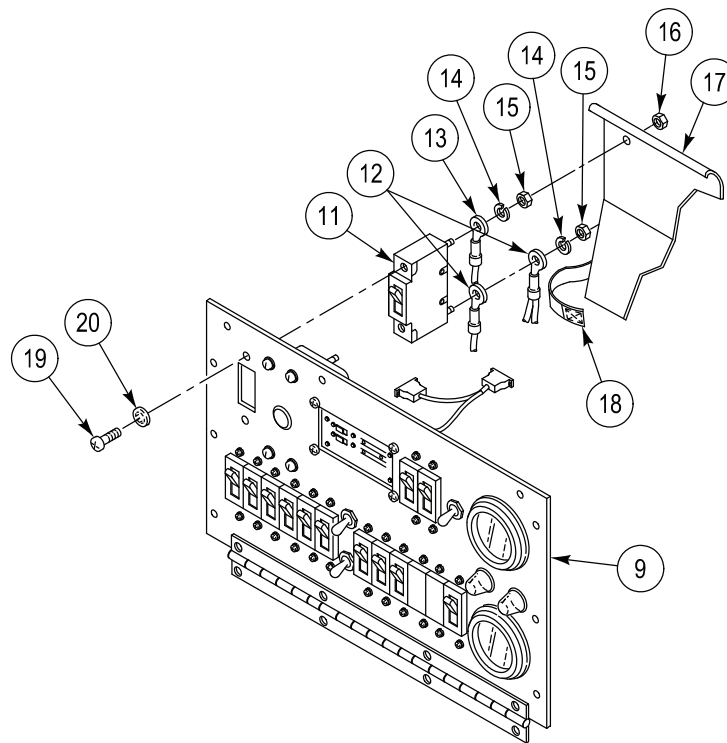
Faceplate Circuit Breaker CB1 Disassembly
